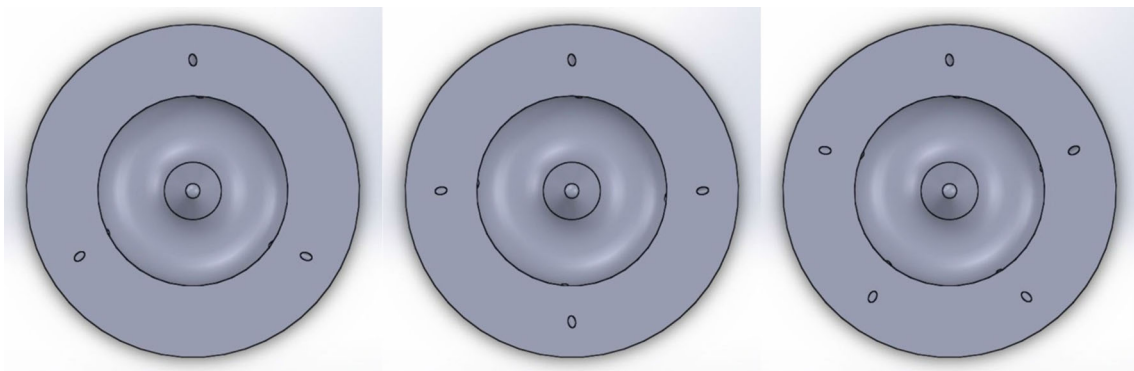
CAD view of 2-mm-diameter hole with the hole count of 3, 4, and 5
